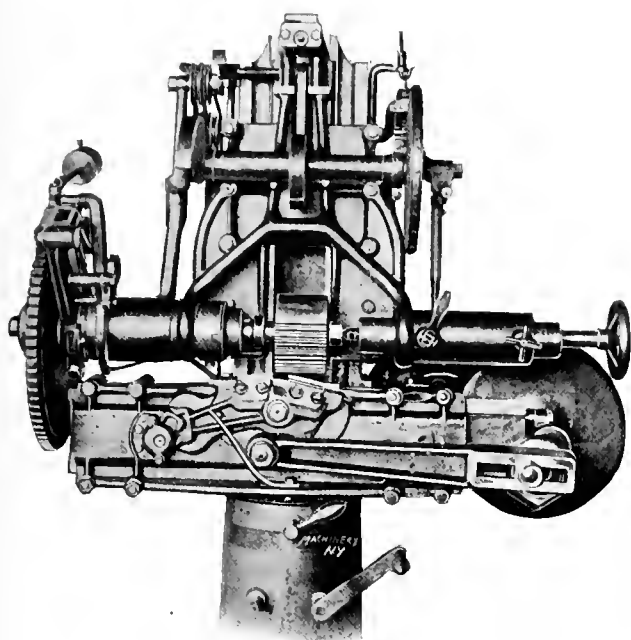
The Pederson Formed Tool Gear Shaping Machine.
